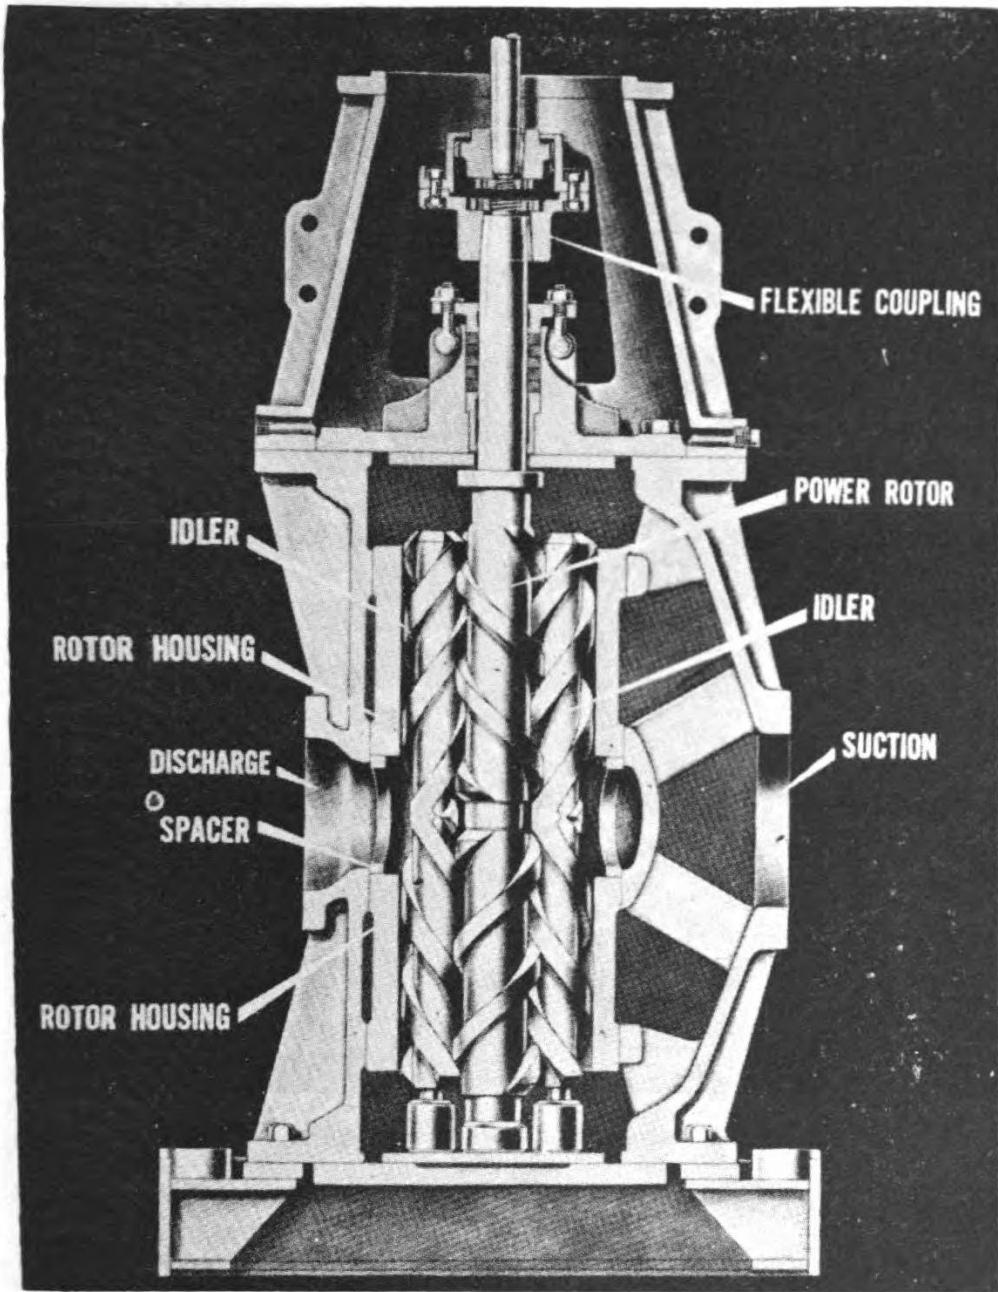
Cutaway view of triple-screw high-pitch pump.
